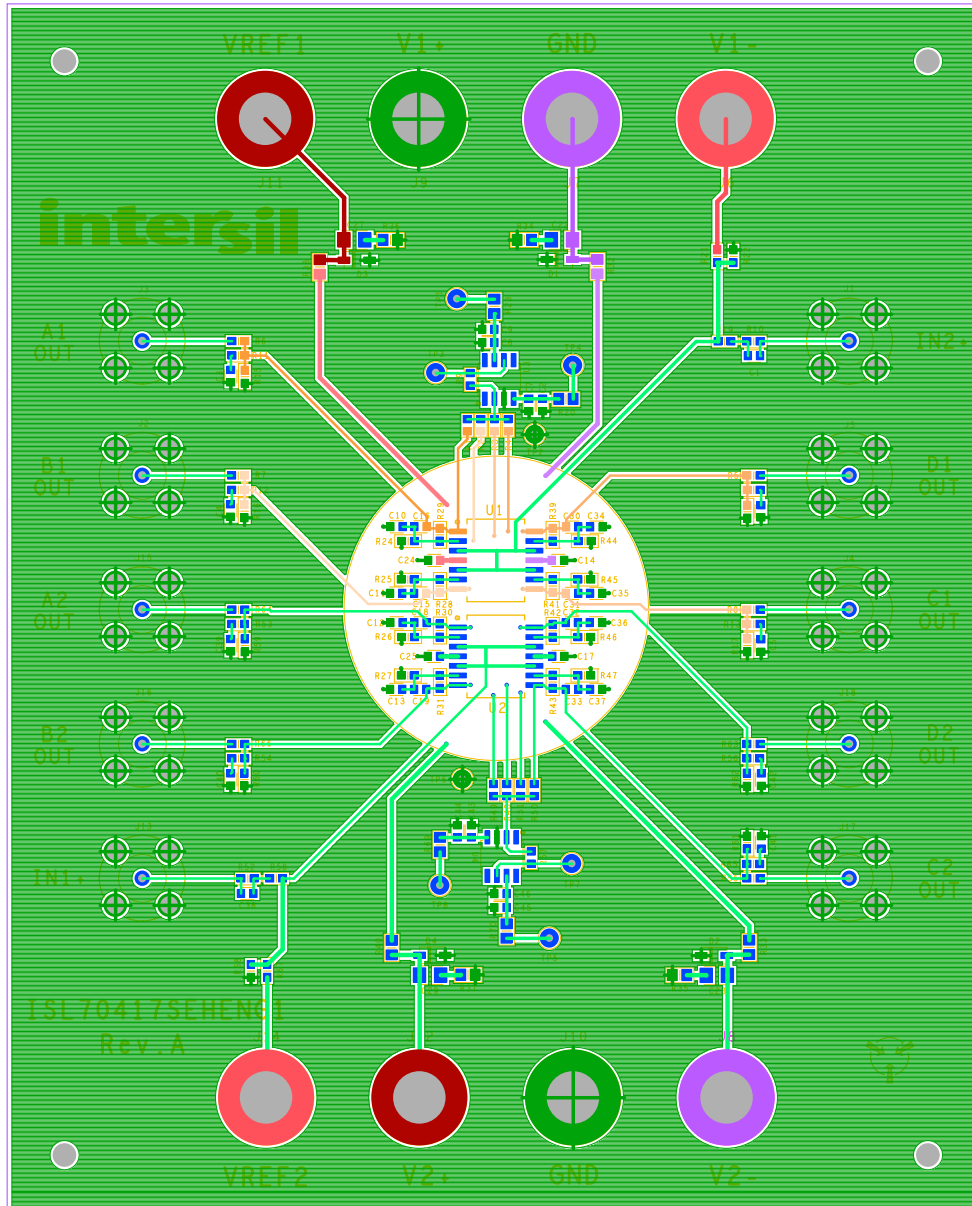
ISL70419SEH SEE TEST BOARD TOP VIEW
